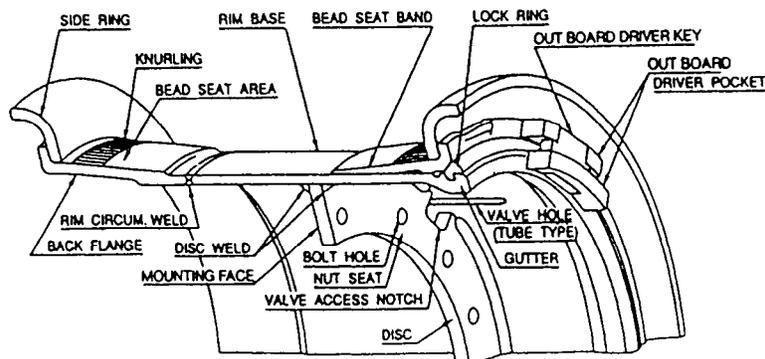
MULTI-PIECE WHEEL COMPONENT NAMES
